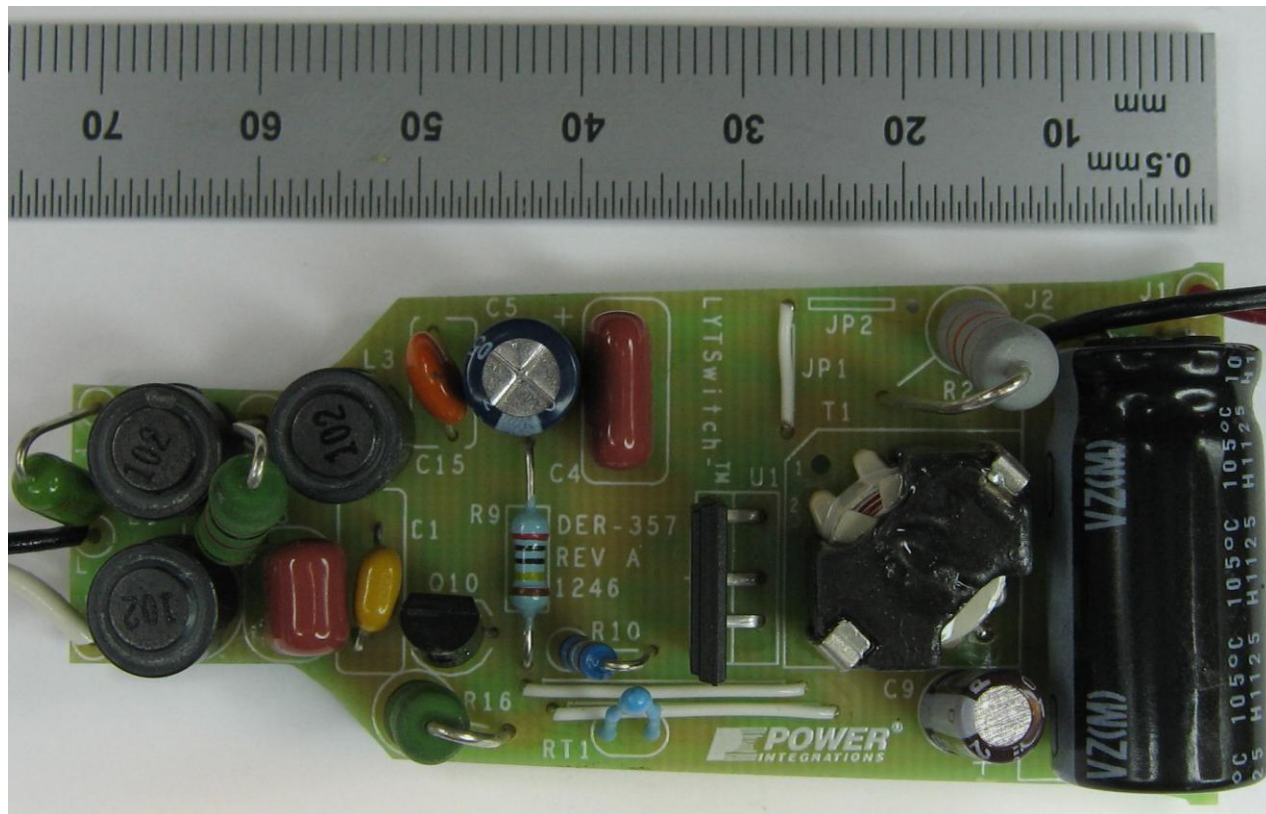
Populated Circuit Board (Top Side) Board Height: 20 mm.
